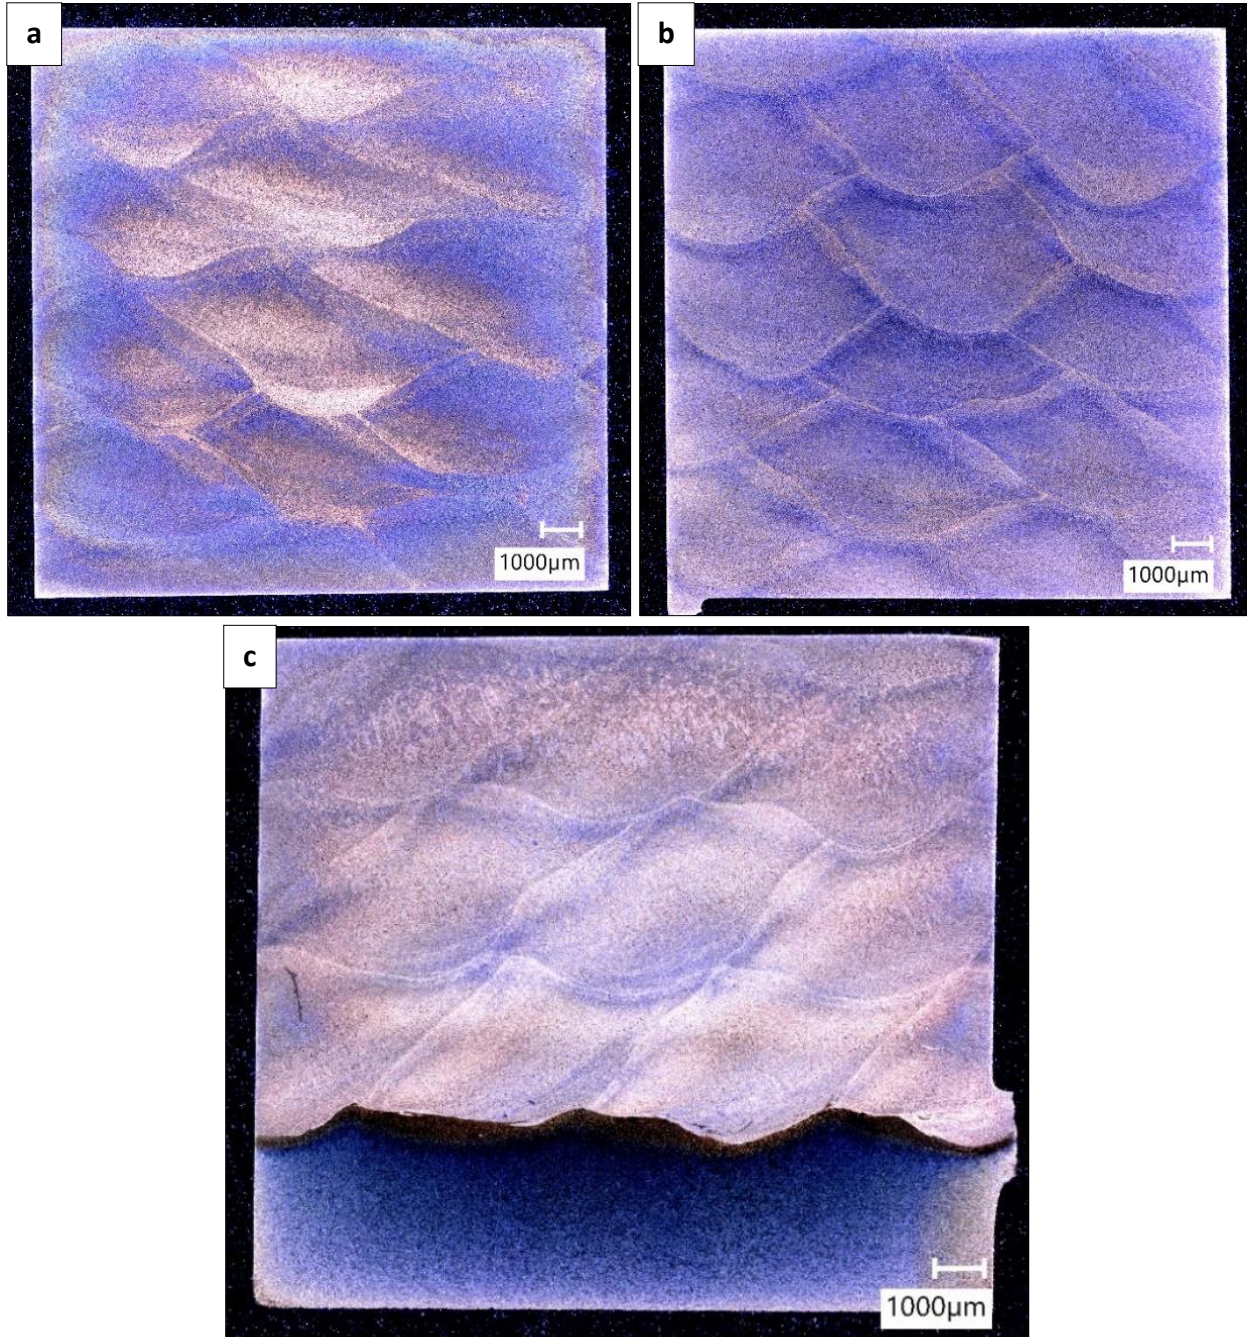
Macroscopic pictures of the 3D printed block produced in RAMLAB, revealing the banded structure of the deposited material. (a) top part, (b) middle part, (c) bottom part, including the first deposited bead and the substrate material.
